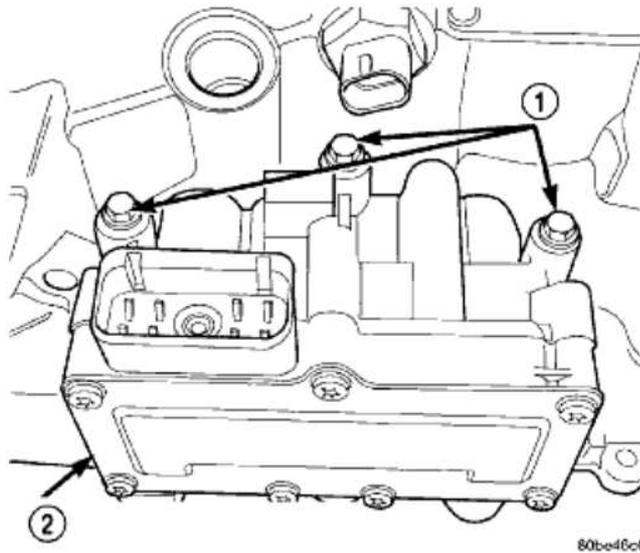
Removing/Installing Solenoid/Pressure Switch Assembly-To-Transaxle Case Bolts
